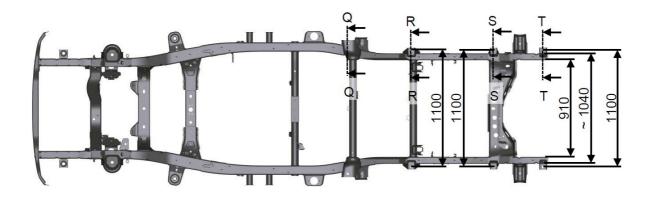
Plan view of ladder frame Amarok SC
